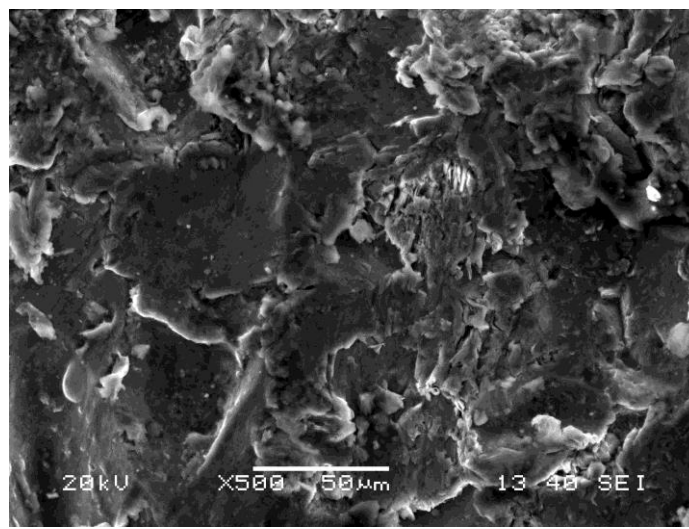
Fractograph of Corrosive wear As-cast Al-1%Sn Alloy sample after 2 weeks of Corrosive wear
